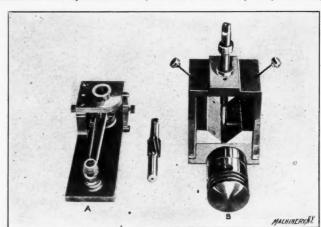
Reaming Jigs for the Crank End of the Connecting-rod, and the Wrist-pin Hole in the Piston
